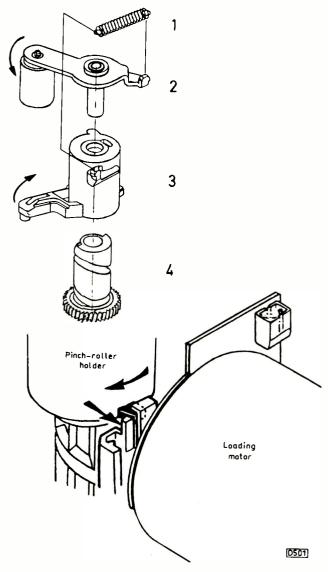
The pinch-roller assembly. 1 Tension spring; 2 pinch-roller bracket; 3 pinch-roller holder; 4 helter-skelter gear.
